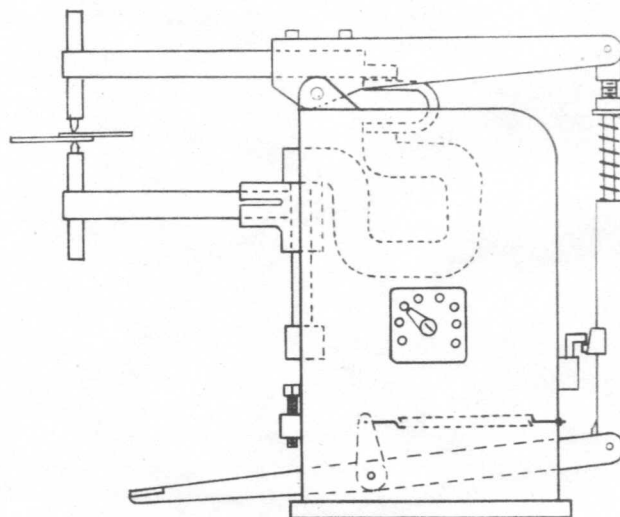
Foot-operated rocker-arm spot-welding machine. (Redrawn by permission from American Welding Society. *Welding Handbook*, 6th ed., 1970, section 2, p. 28.4.)
